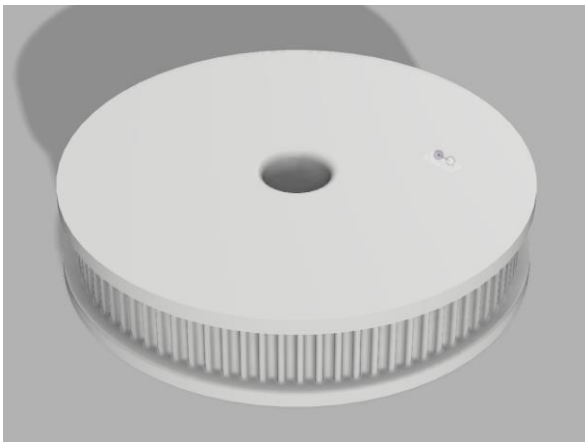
General assembly for horizontal translation mechanism (HTM) designed in Fusion360
